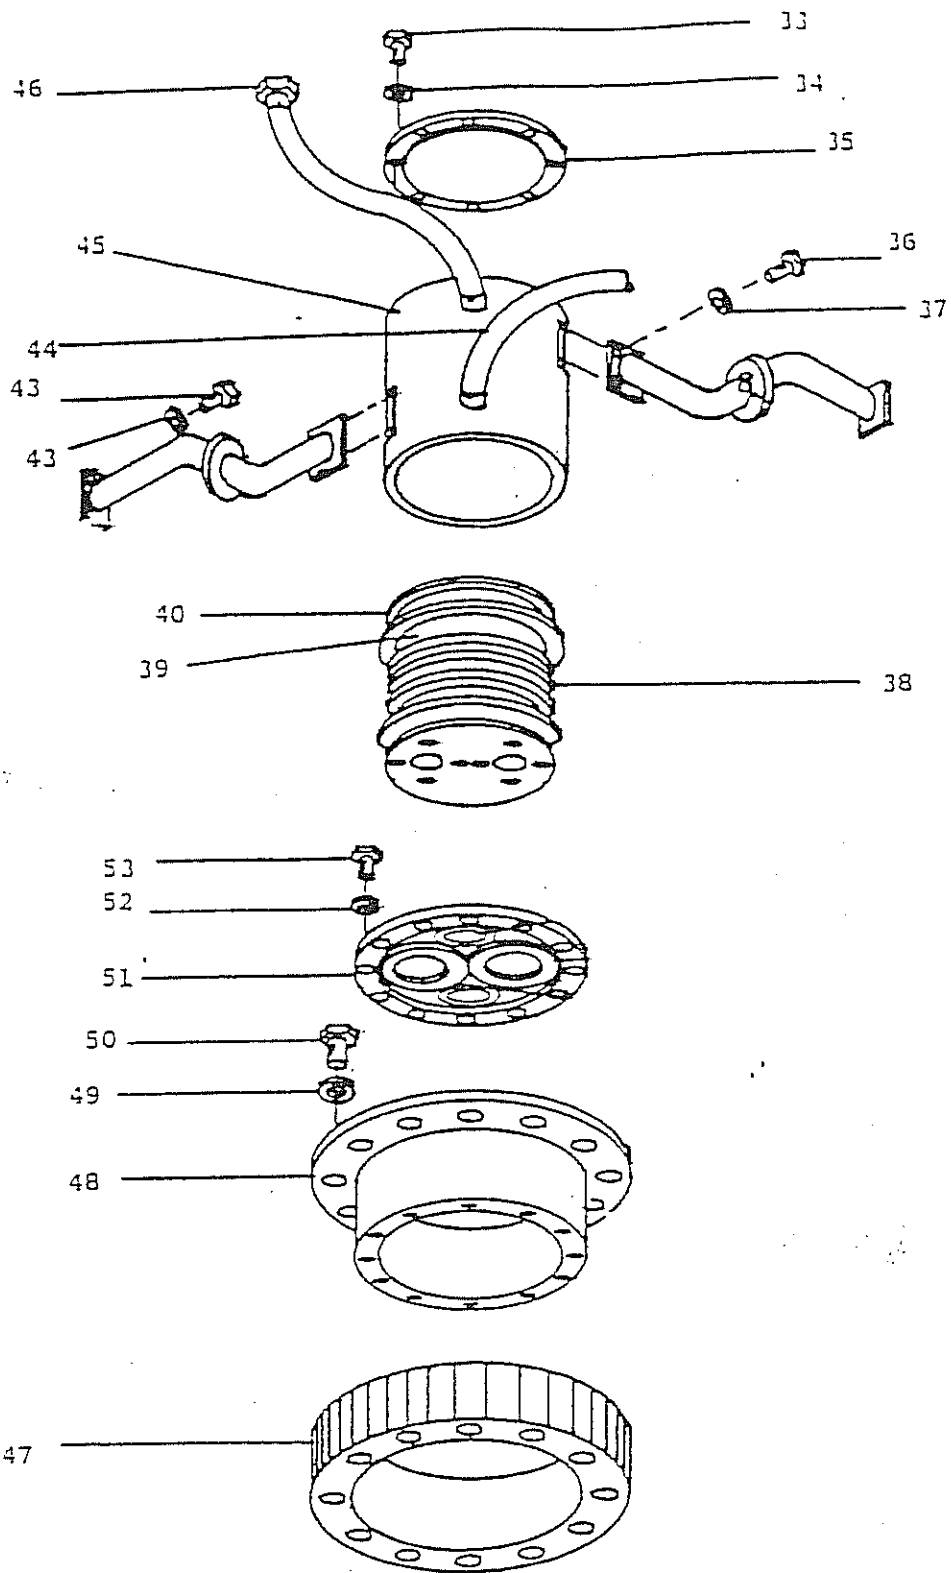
(3 of 3). Upper Outdrive Housing Assembly
